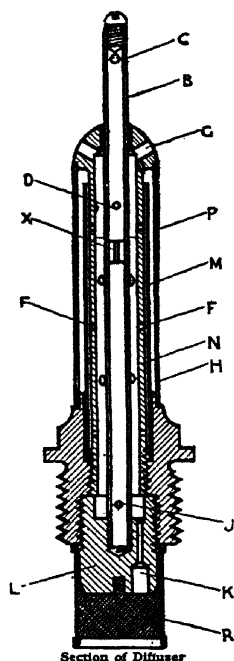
Section through jet of Claudel-Hobson Carburettor.
